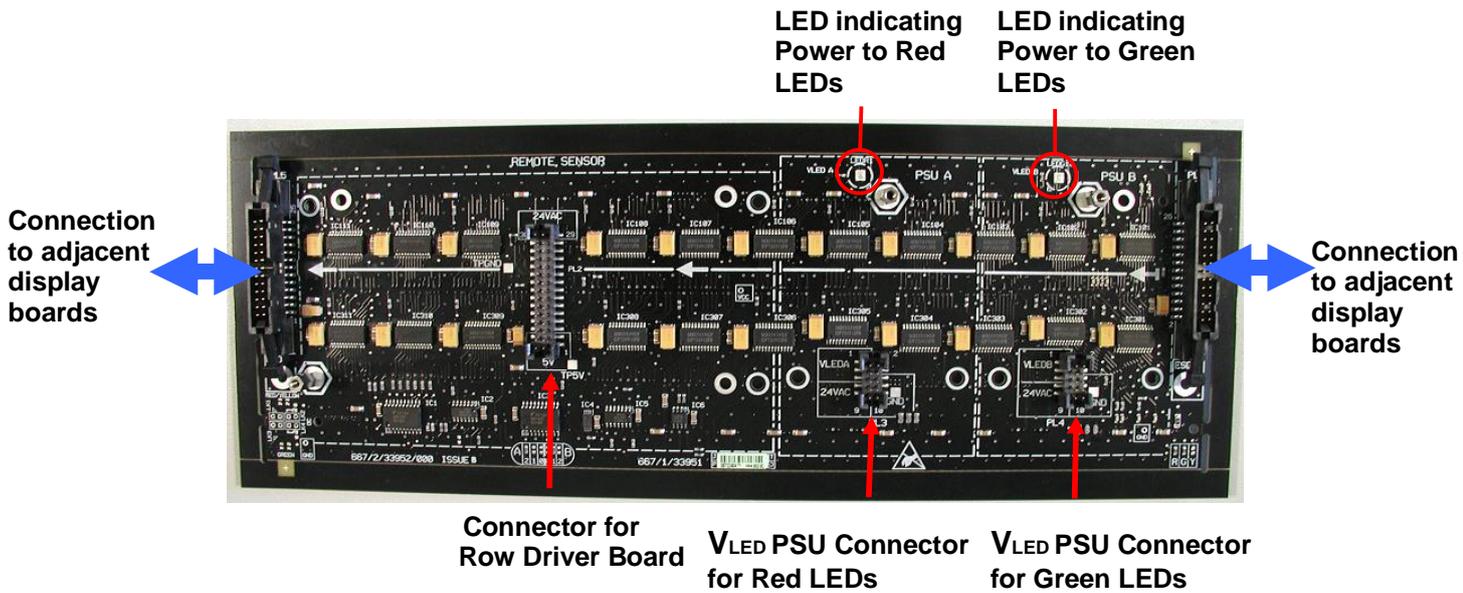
100mm Character PCB Assembly (Red/Green) – Viewed from Rear
